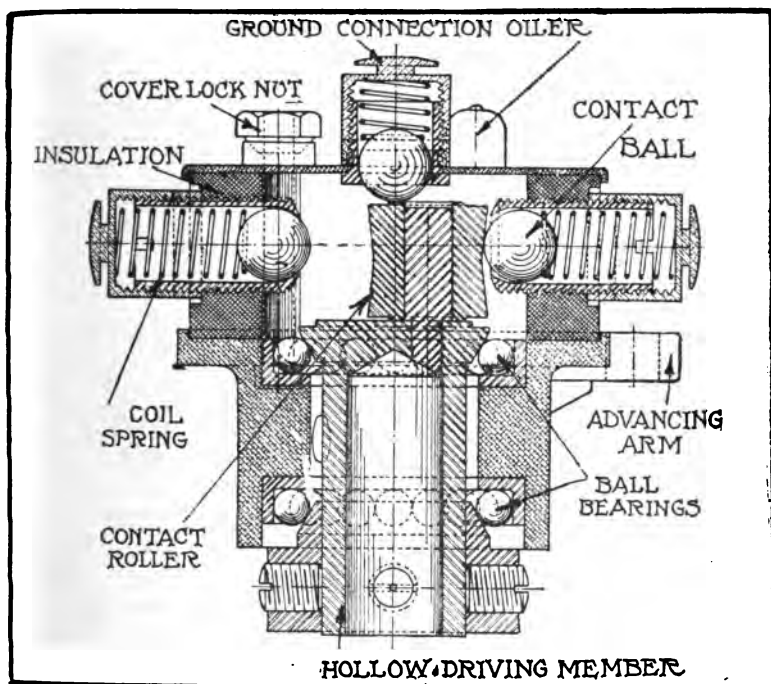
Sectional View Showing Construction of Ball Bearing, Ball Contact Timer.
